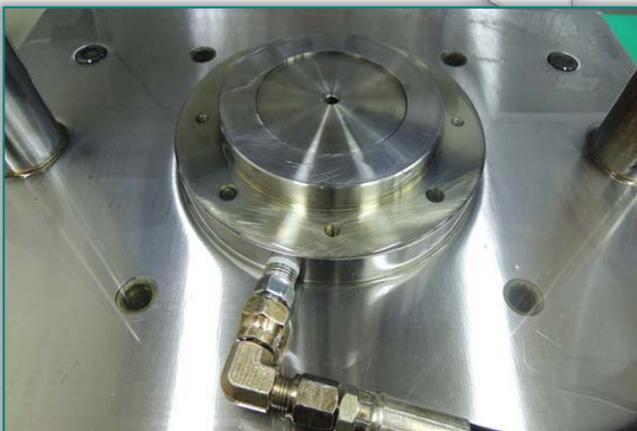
Real picture of the circular pad (hydrostatic bearing)
